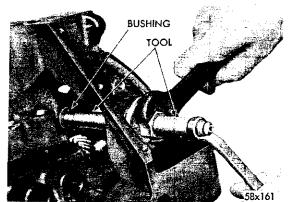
Burnishing Distributor Drive Shaft Bushing
